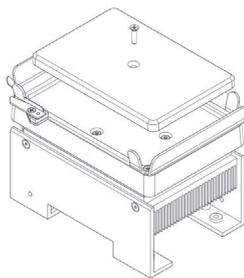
· Assemble the plate of flat bottom adapter with 1 screw in the middle
